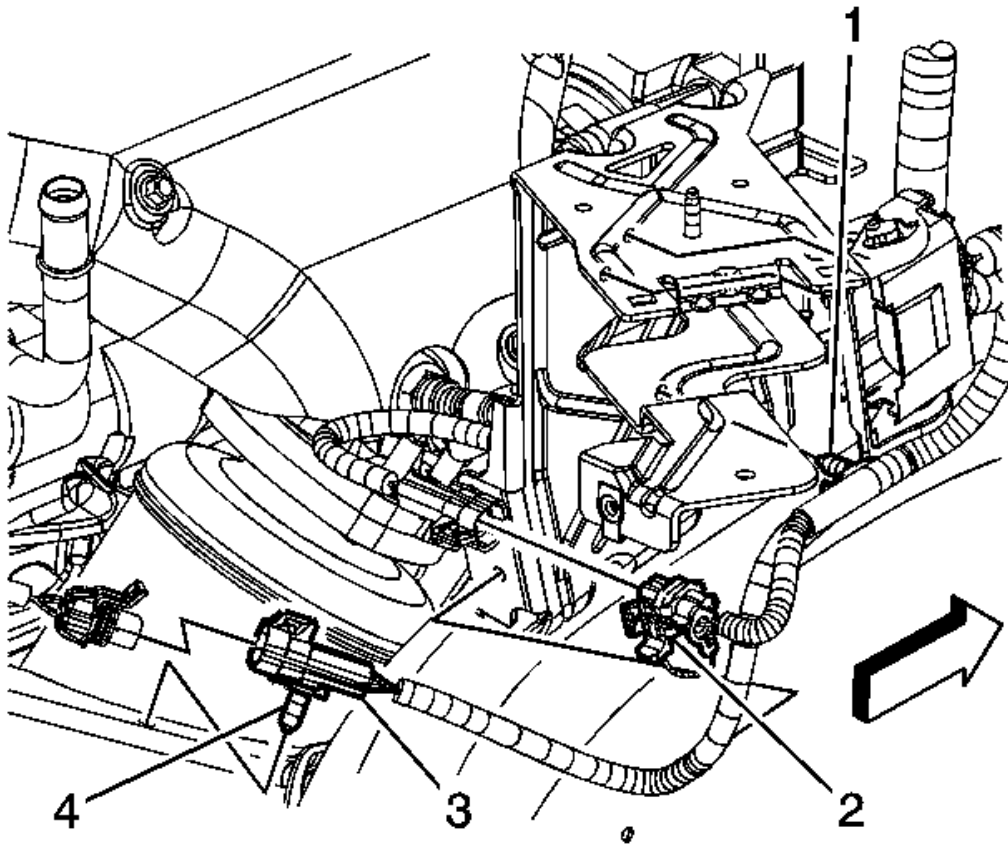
Identifying CPA Retainer & HO2S Electrical Connector
